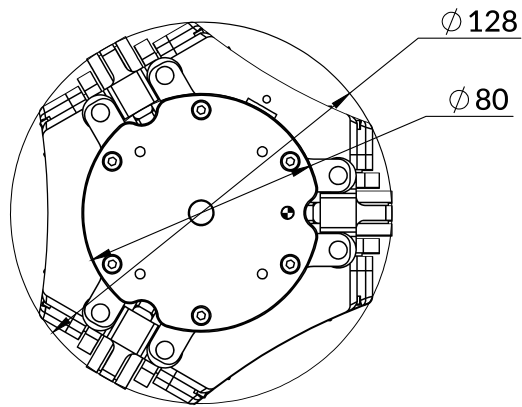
SusGrip 3F Mechanical Dimensions (Closing)
